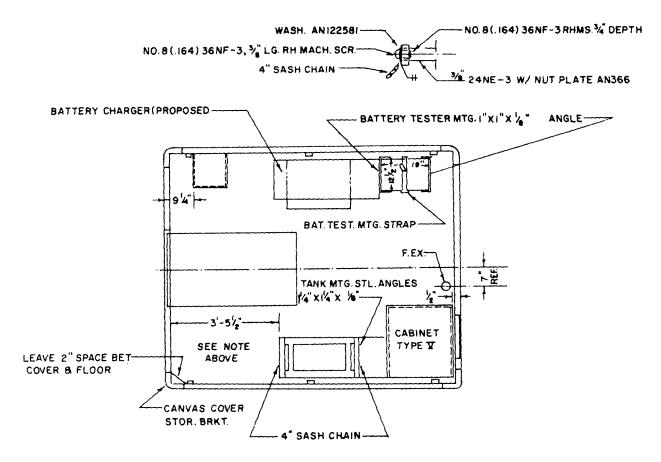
Floor plan trailer mounted Shop Set C-2, top view.
